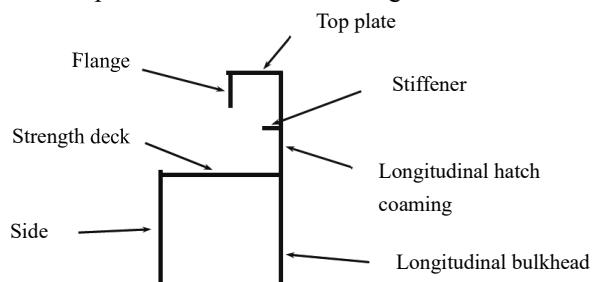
Typical Deck Structure of Ships with Membrane Tank Carrying Liquefied Gases in Bulk
